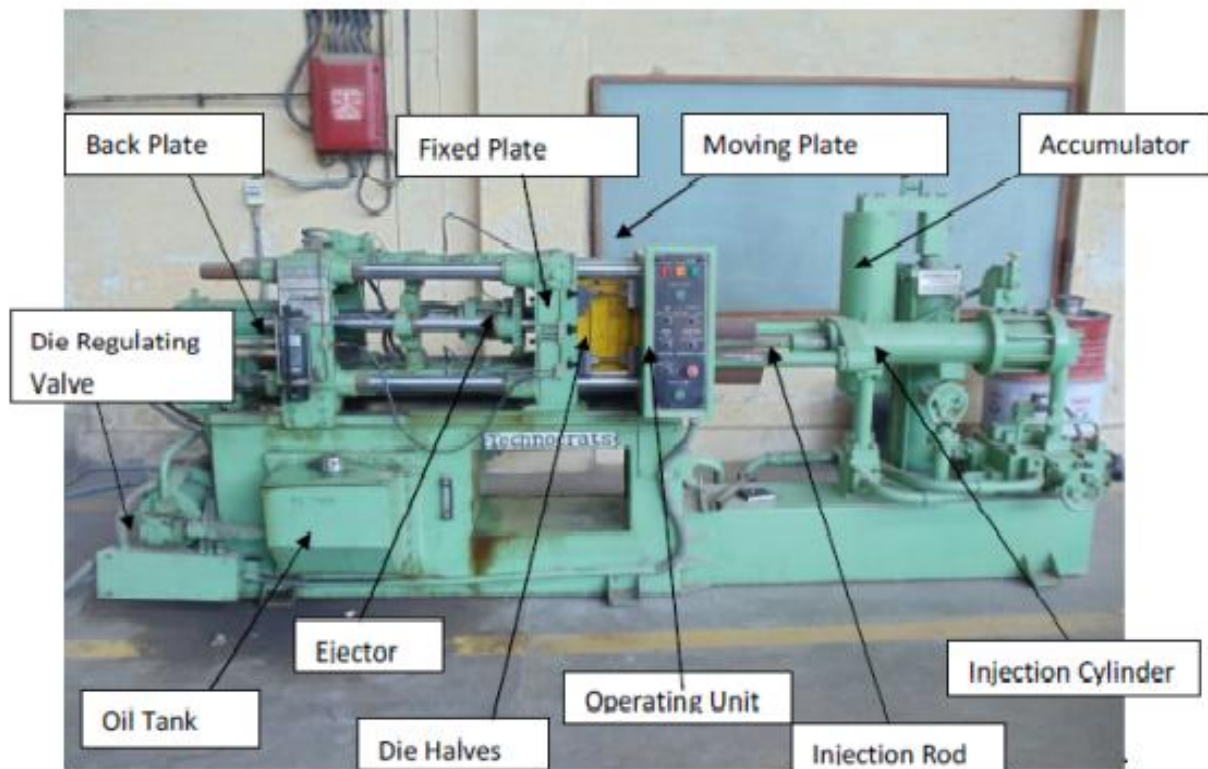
Cold chamber die casting machine in workshop at Thapar University, Patiala
